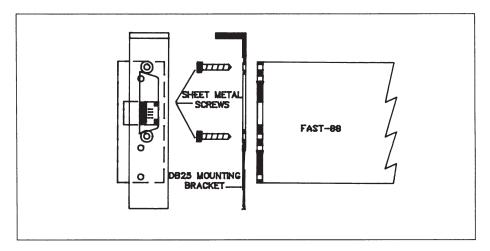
Fast88 Installation in DB-25 Mounting Hole
